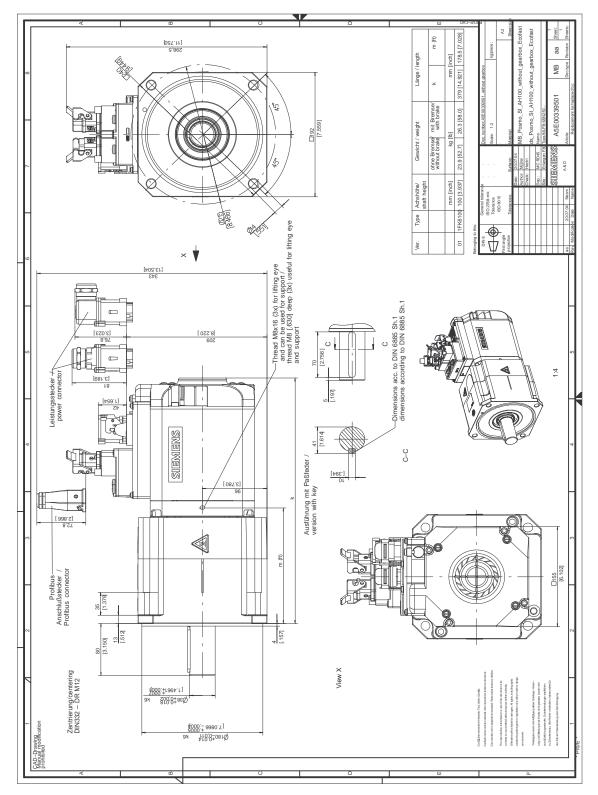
Dimension drawing POSMO SI 6SN2500-2CF□0-1G□□
